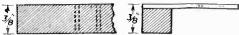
The baseboard may be a single thickness or made up by side runners so that the overall height is §in.
